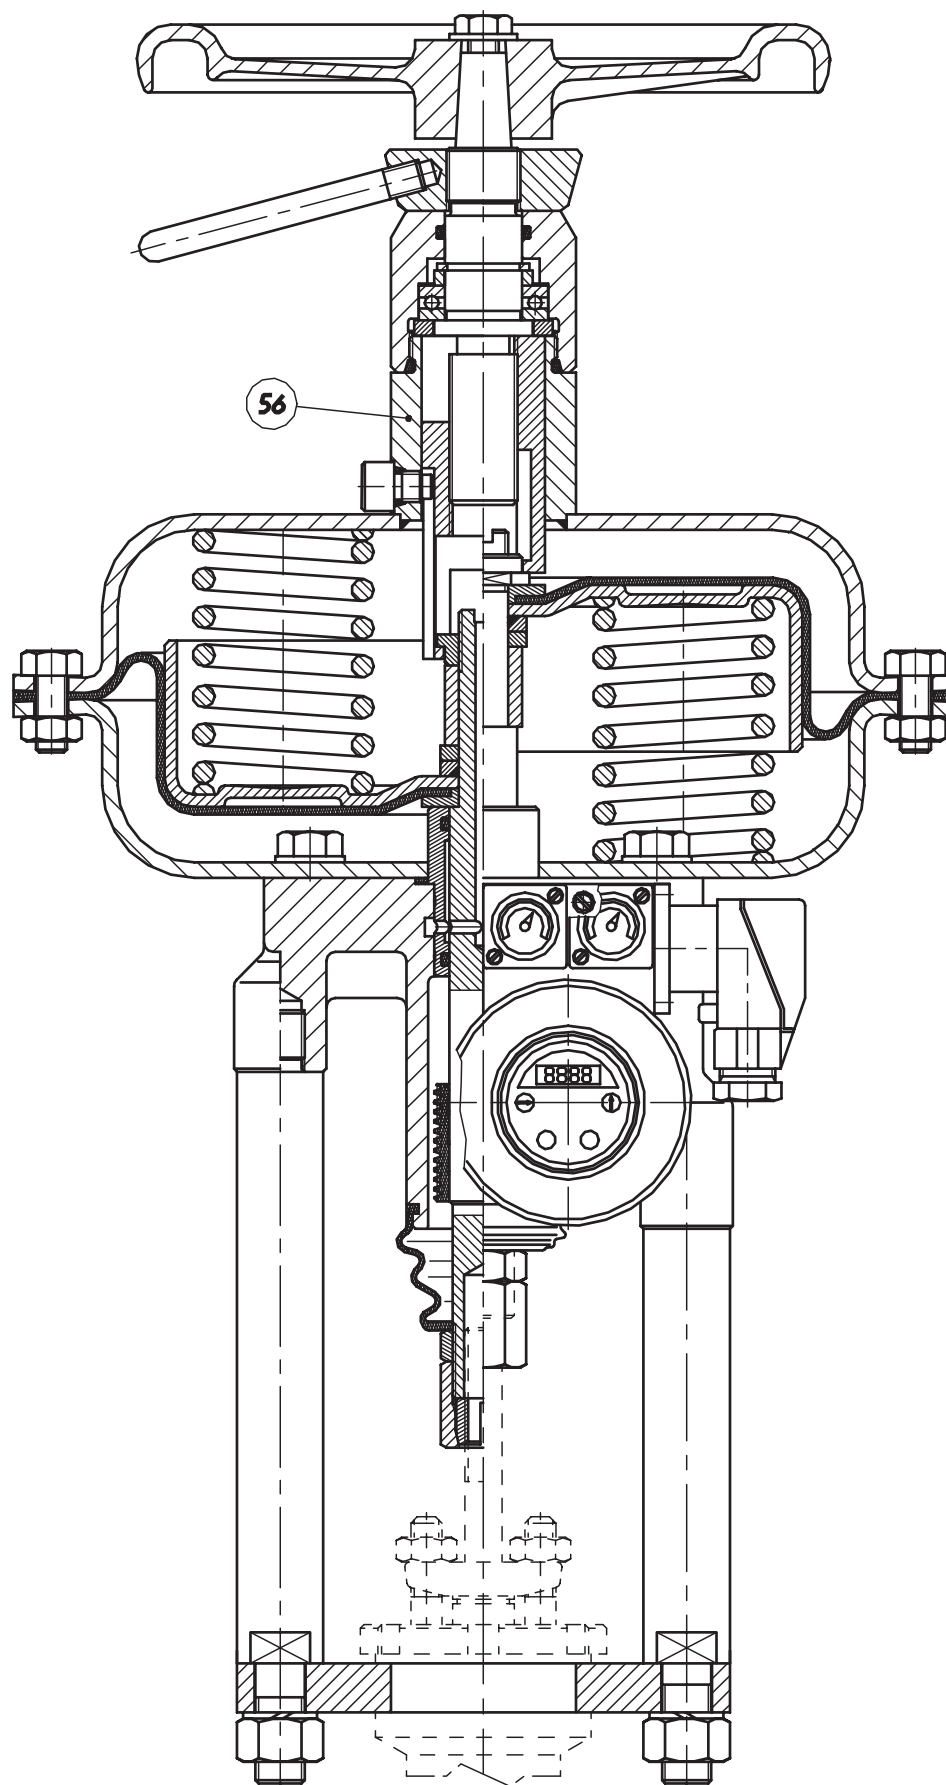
The pneumatic actuator, type P5/R5, with a handwheel
